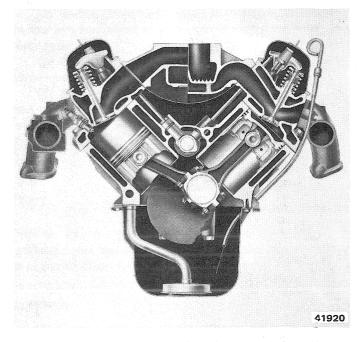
B-99 Sectional View of Eight-Cylinder Engine Assembly
